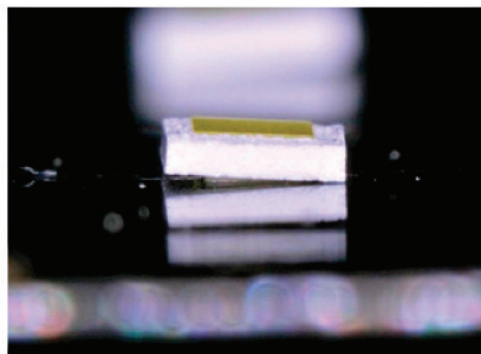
LUXEON Neo soldered to a PCB with high tilting angle
